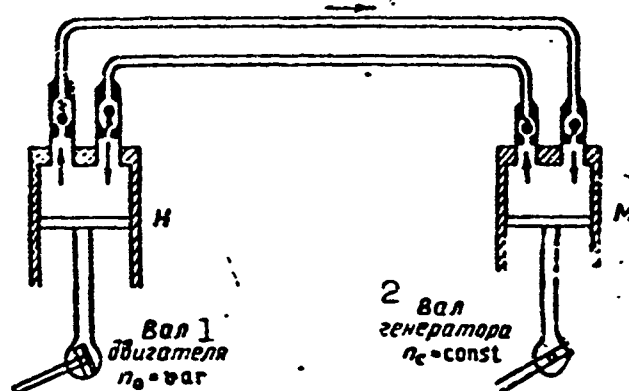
Operating diagram of element in volume-type hydraulic clutch. 1) Motor shaft; 2) generator shaft.
